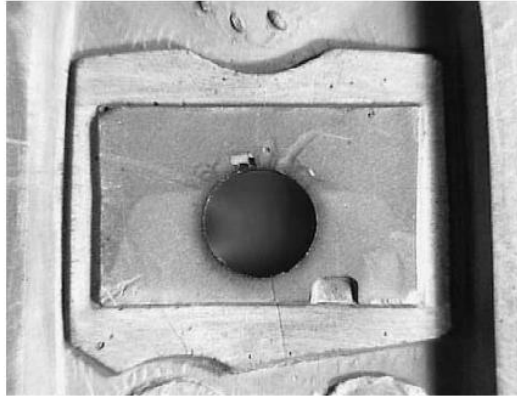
Crack appearing on the surface of mould half (Cheah *et al.*, 2002)
